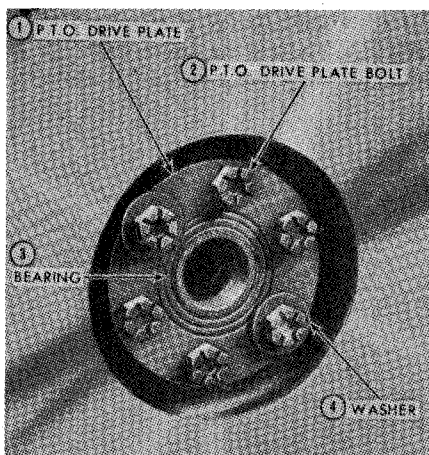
Flat washers are installed under two of the flywheel and pto drive plate retaining bolts to hold clutch shaft pilot bearing in position.
